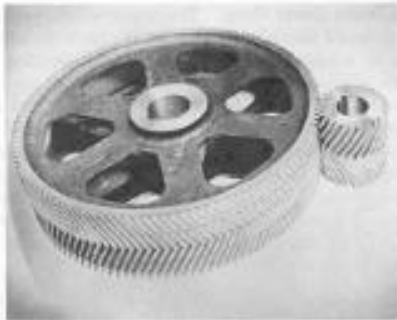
Pair of meshing herringbone gears (Courtesy of the Tool Steel Gear and Pinion Company, Cincinnati, Ohio)
